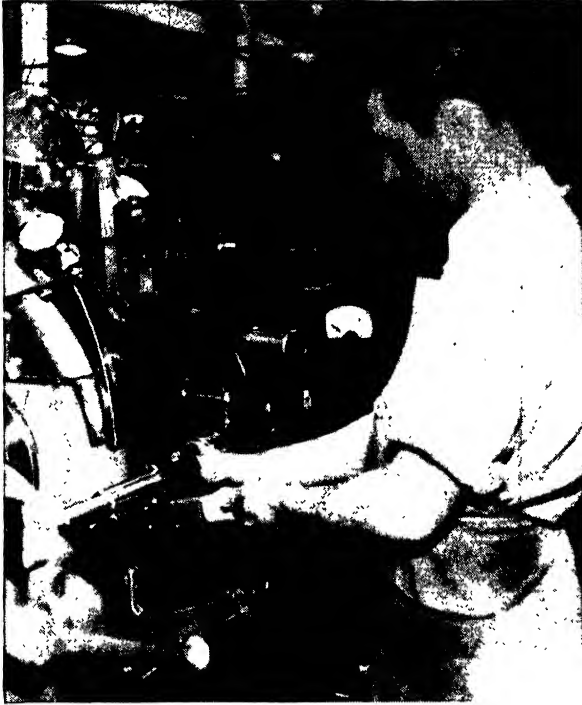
13. Electrolimit snap gage used to check diameter of a part while in grinding machine. (Courtesy of Pratt & Whitney Division, Niles-Bement-Pond Company.)
